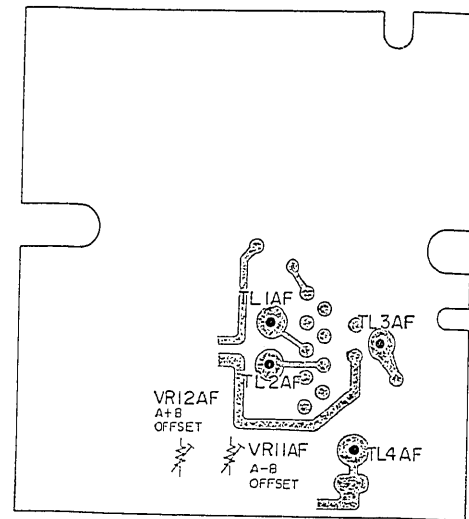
Autofocus (AF) Circuit Board (Solder Side)
